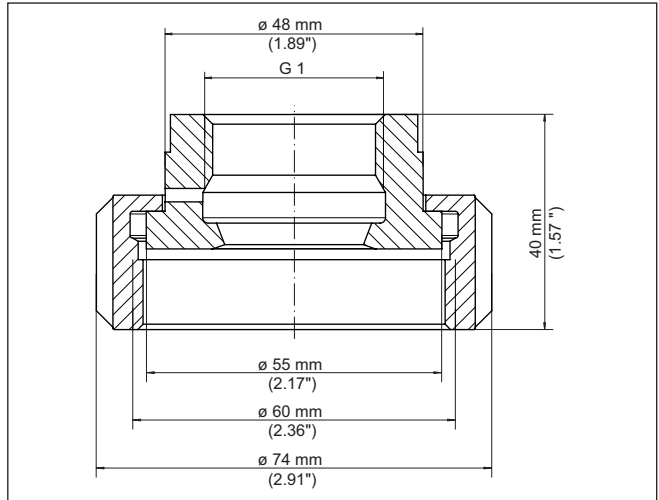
Dimensions hygienic adapter G1 (DIN 3852-X) on SMS DN 38 - Cone seal
